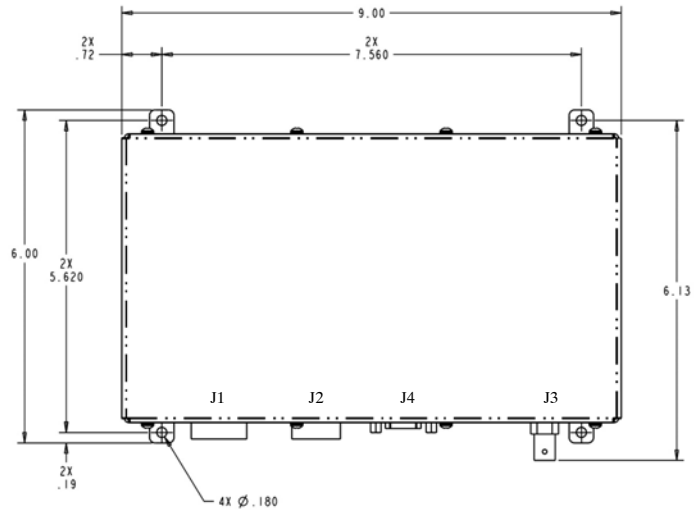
CrewMate Aircraft Interface Unit Dimensions (in Inches)
